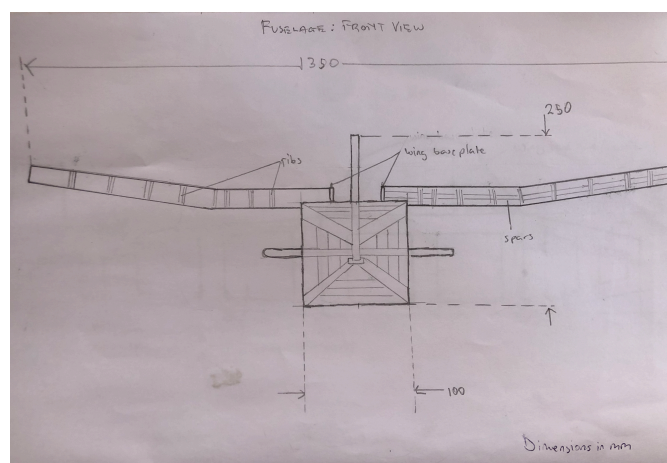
3 Sketch of fuselage front view. Dimensions in mm.
